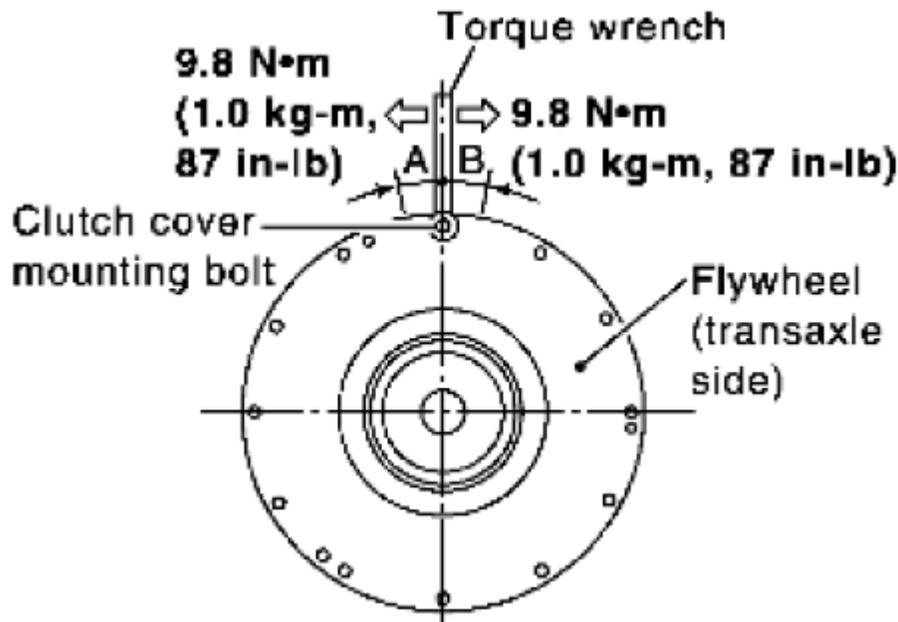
Identifying Dimensions Of Movement Amounts On Circumference Of Flywheel
